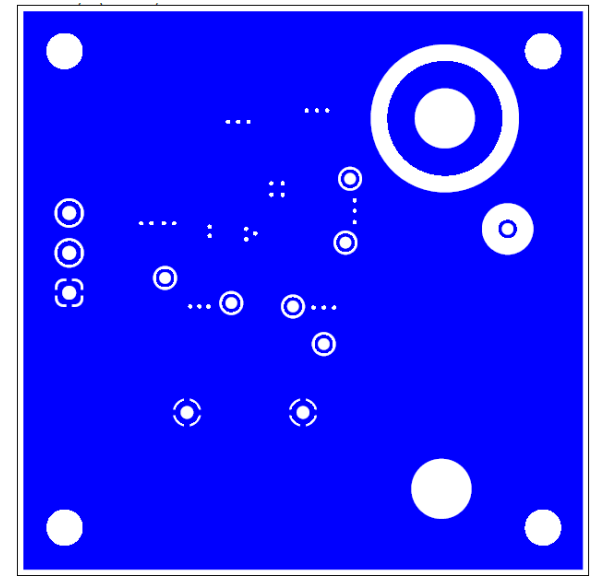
FAD1100EVB PCB Internal Plane 2 Drawing
